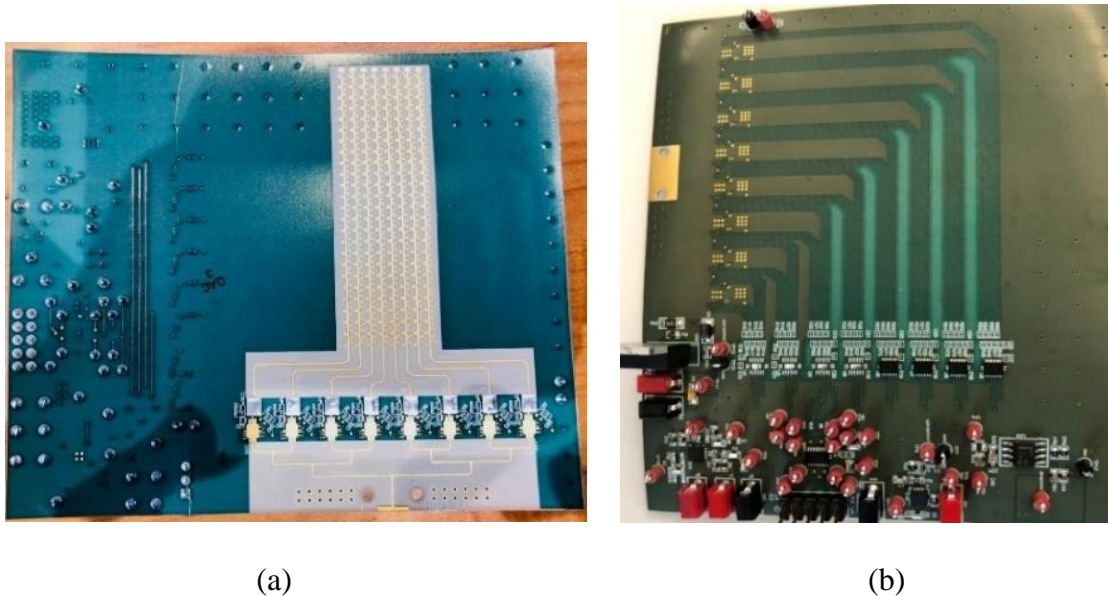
Fabricated photograph of the integrated Butterfly phased array aperture and the beamforming board (a) Top view and (b) Bottom view.
